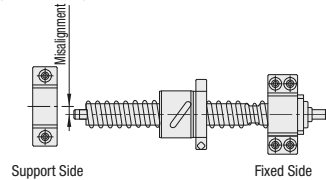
Parallelism Error of Linear Guide and Ball Screw
